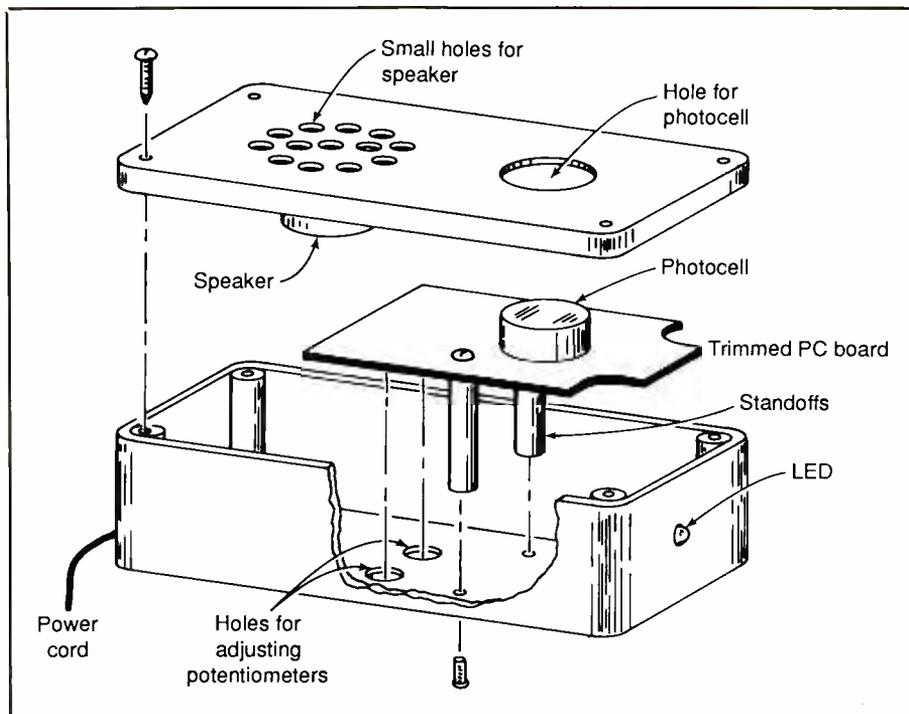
Assembly details for project. Here, the photocell is shown mounted on the circuit board behind a circular cutout.
